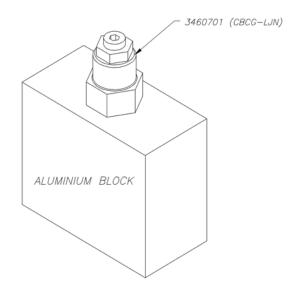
ADJUSTING THE COUNTERBALANCE VALVE (CBCG-LJN)
